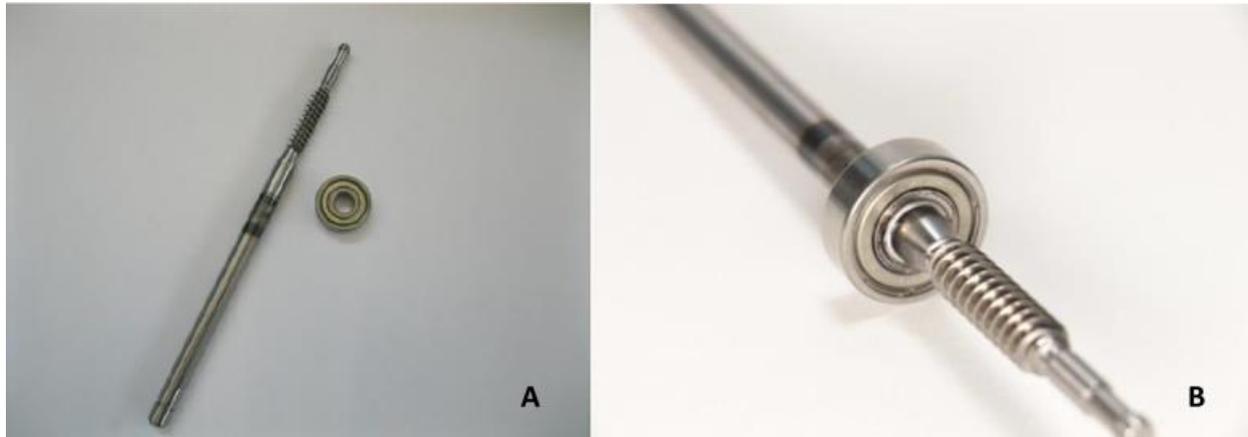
Ball bearing on shaft welding: (A) pieces to be welded together, (B) final welded assembly [7]
